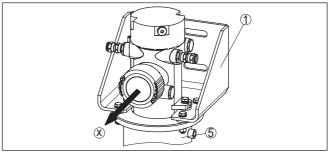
Mounting direction of the sensor towards the fastening bracket
